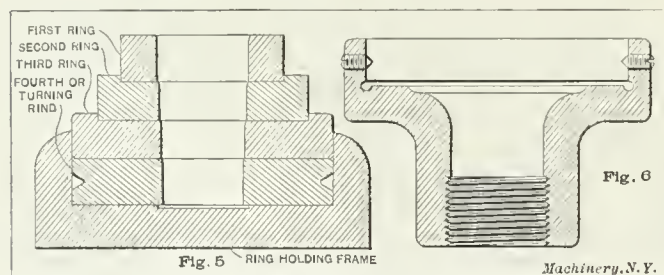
Compression Rings and Holder. Fig. 6. Chuck for Holding Rings in Turret
